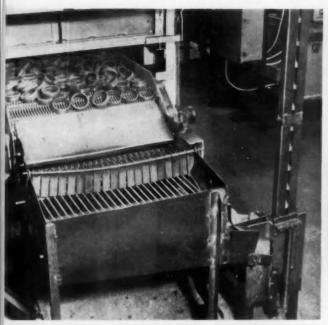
Exit end of Surface Combustion draw furnace. The parts move out on the chute in the foreground and upward by elevator to the next operation.
